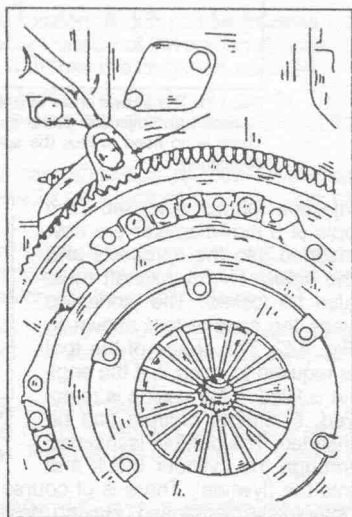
Locking the flywheel against rotation. Insert a toothed sector (arrow) into the starter ring gear teeth.
